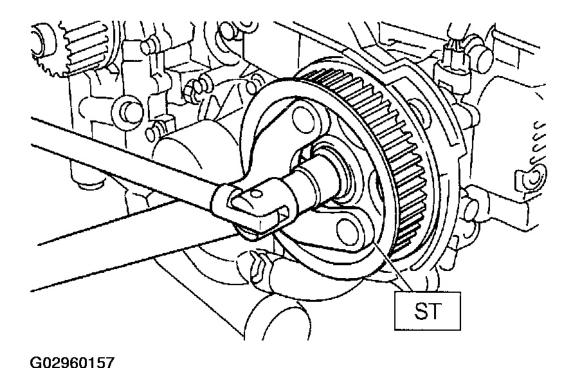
Installing Camshaft Sprocket Courtesy of SUBARU OF AMERICA, INC.
